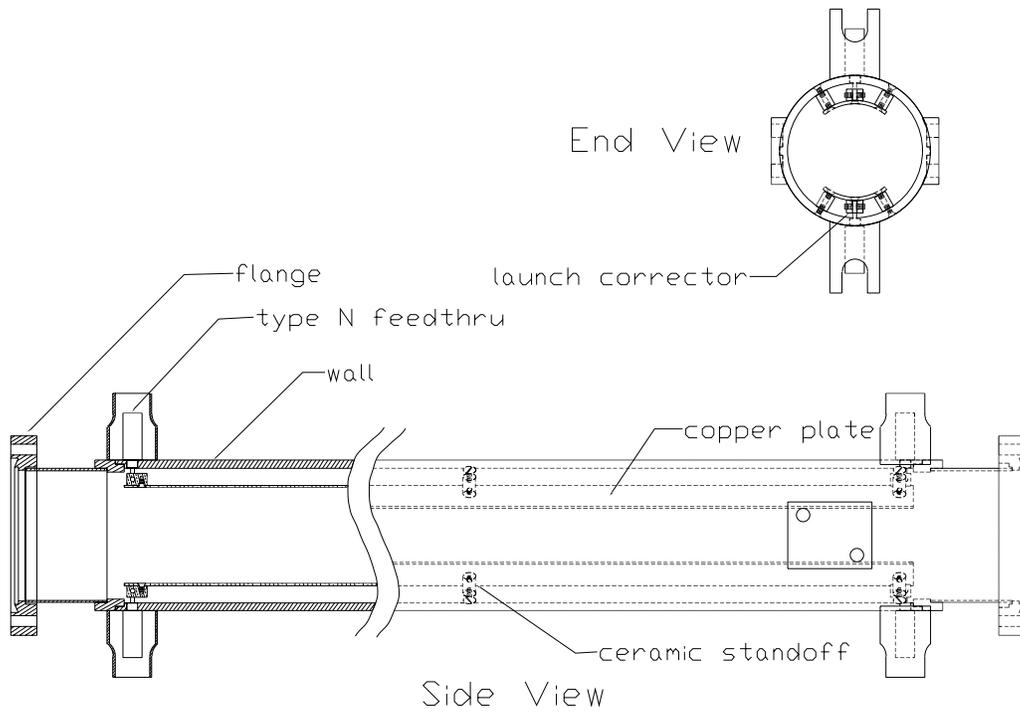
This figure shows the final assembly drawing of the stripline kickers.
